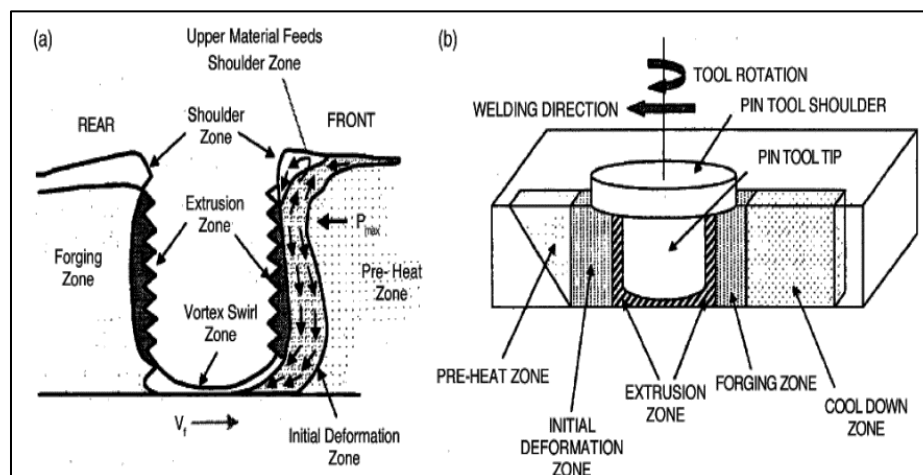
(a) Metal flow patterns and (b) metallurgical processing zones developed during friction stir welding [21]
